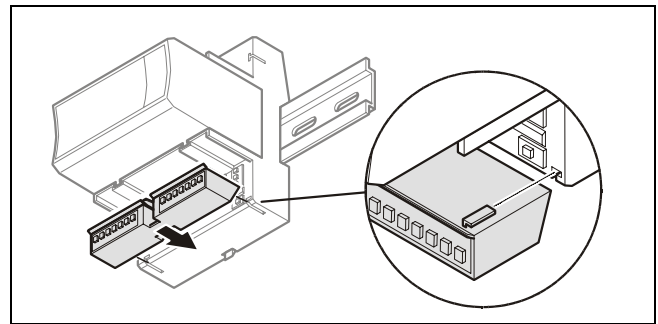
Mounting the auxiliary terminal package onto the terminal socket / mixed I/O module
